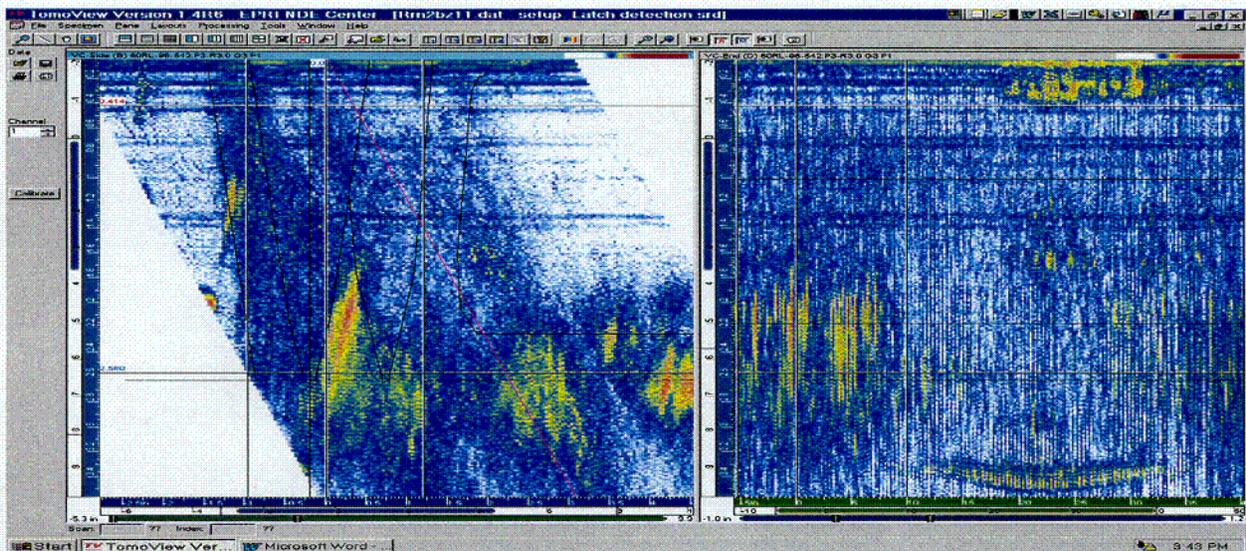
Ultrasonic image of indication in nozzle to safe-end weld N2B. The co-location of the indication with the fragment of the original safe-end is shown.
